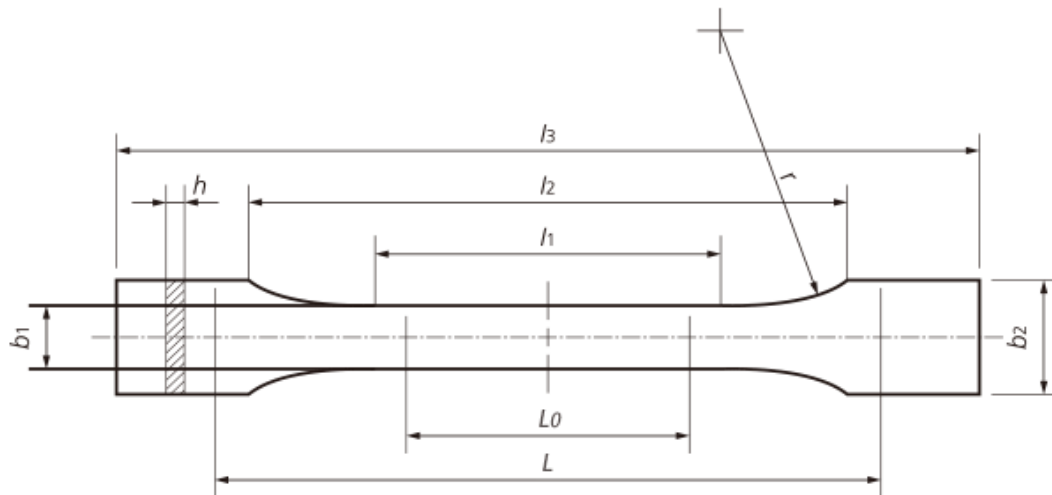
type I tensile specimen geometry. Adapted from [81]
